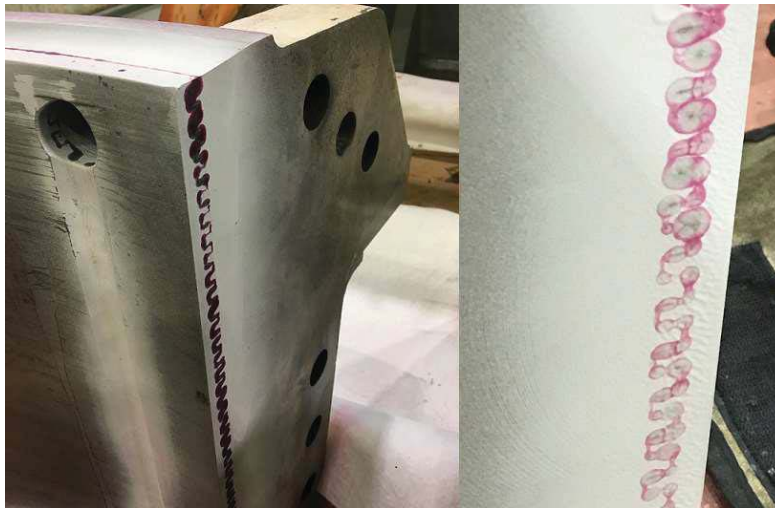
Turbine Guide Bearing, PT Section 1-3
